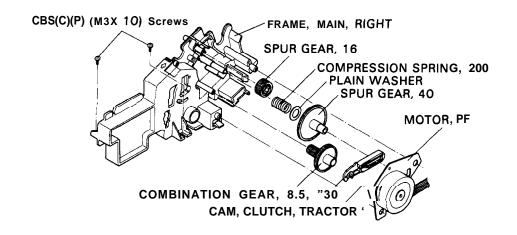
Disassembling the FRAME, MAIN, RIGHT
